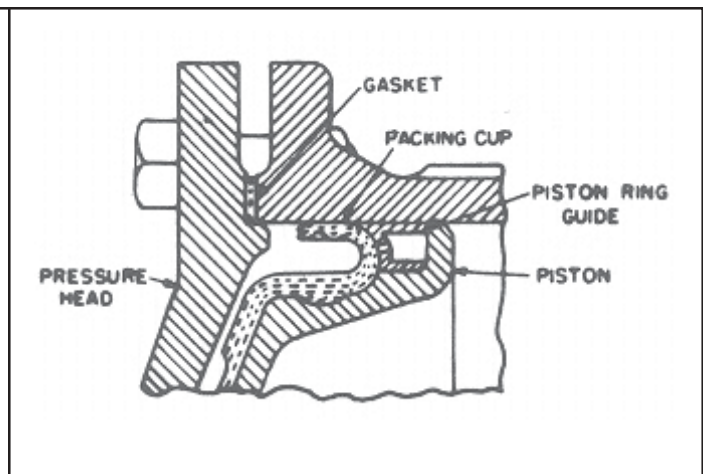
Partial Section of Brake Cylinder Showing the Piston Ring Guide
